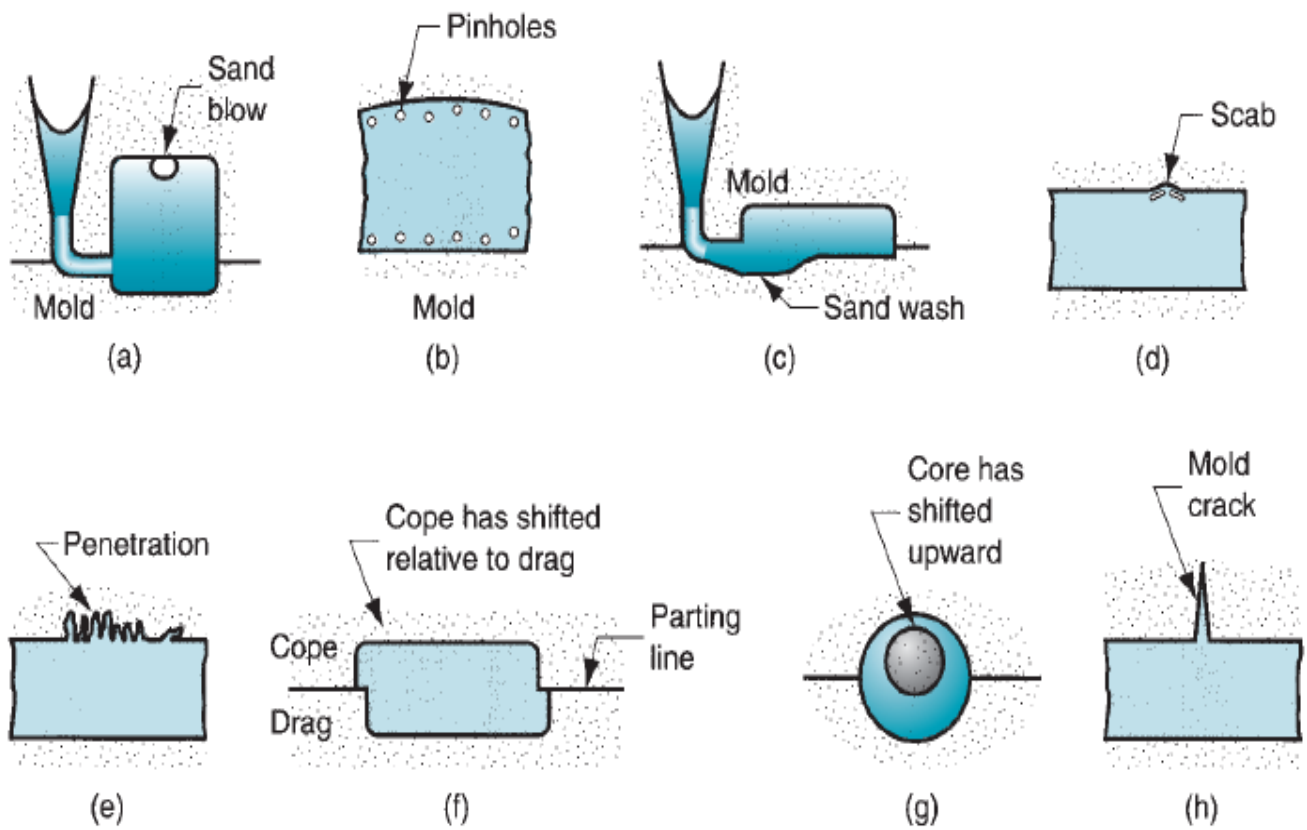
Common Defects of Sand-Mold Castings.
